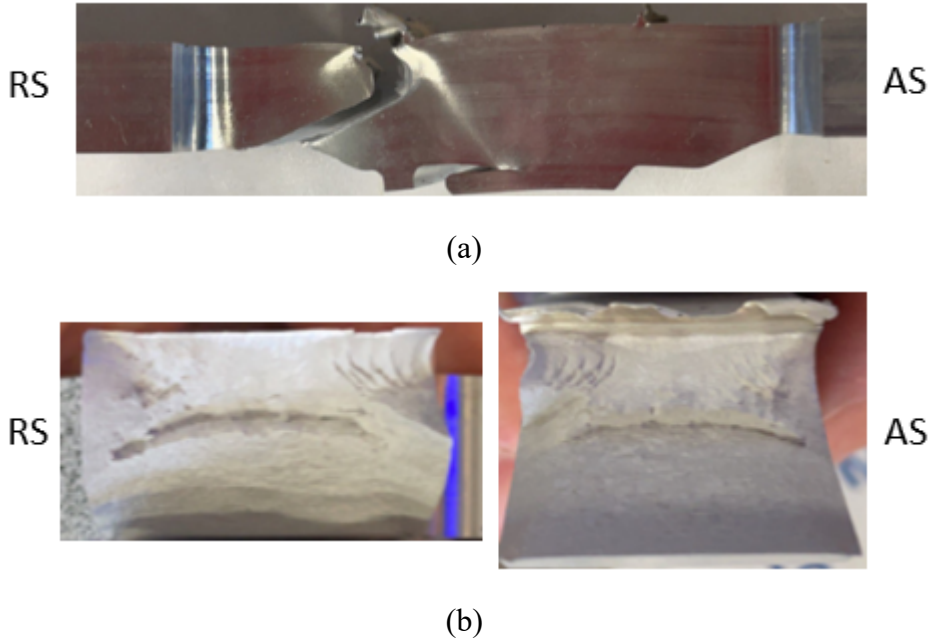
Macro fracture images of 22mm 2Gap specimen. Transverse image of fracture shows change in fracture orientation (a), fracture of surface is uneven after change in fracture orientation (b).
